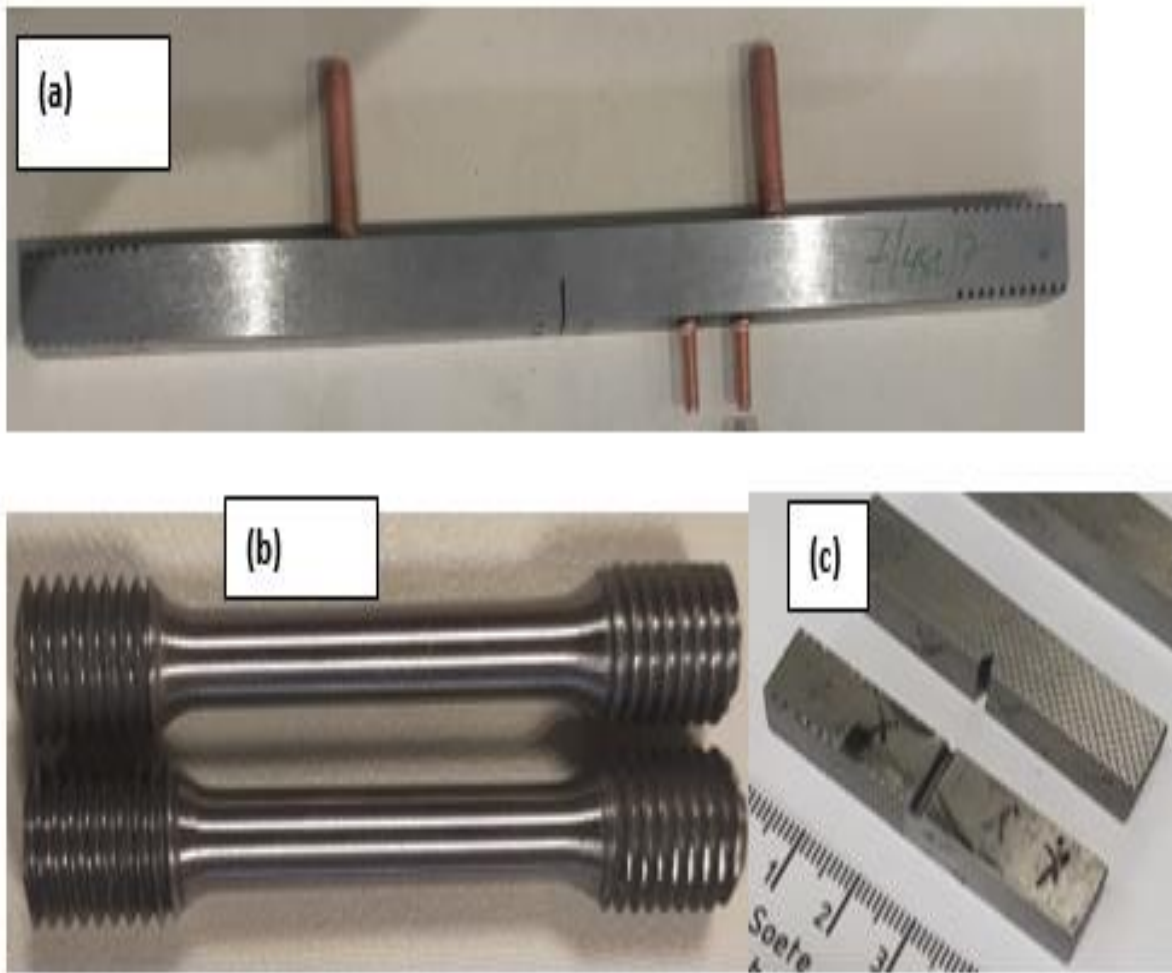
Images of SENT specimen (a), round specimens for static tensile test (b), threaded samples and Charpy impact specimens (c).
